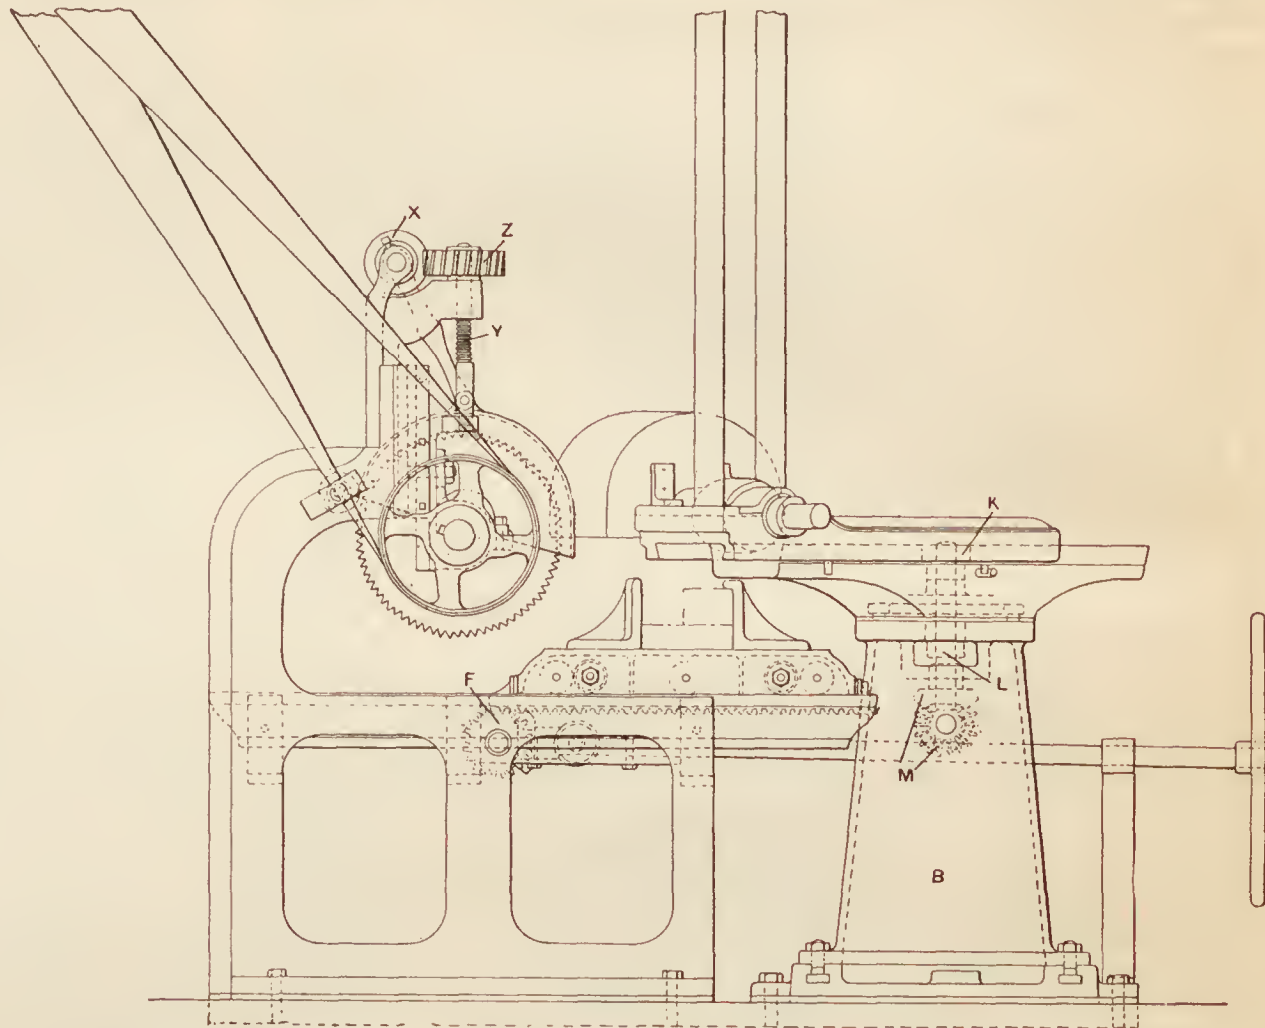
END ELEVATION OF BELT-RAIL CHECKING MACHINE, GRAND TRUNK RAILWAY SHOPS
